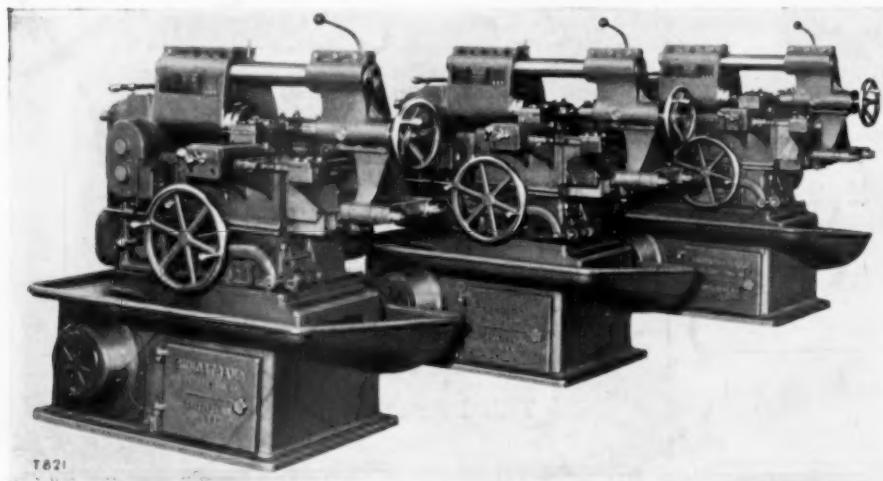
Three Stub Lathes equipped for piston-ring turning and grooving.
